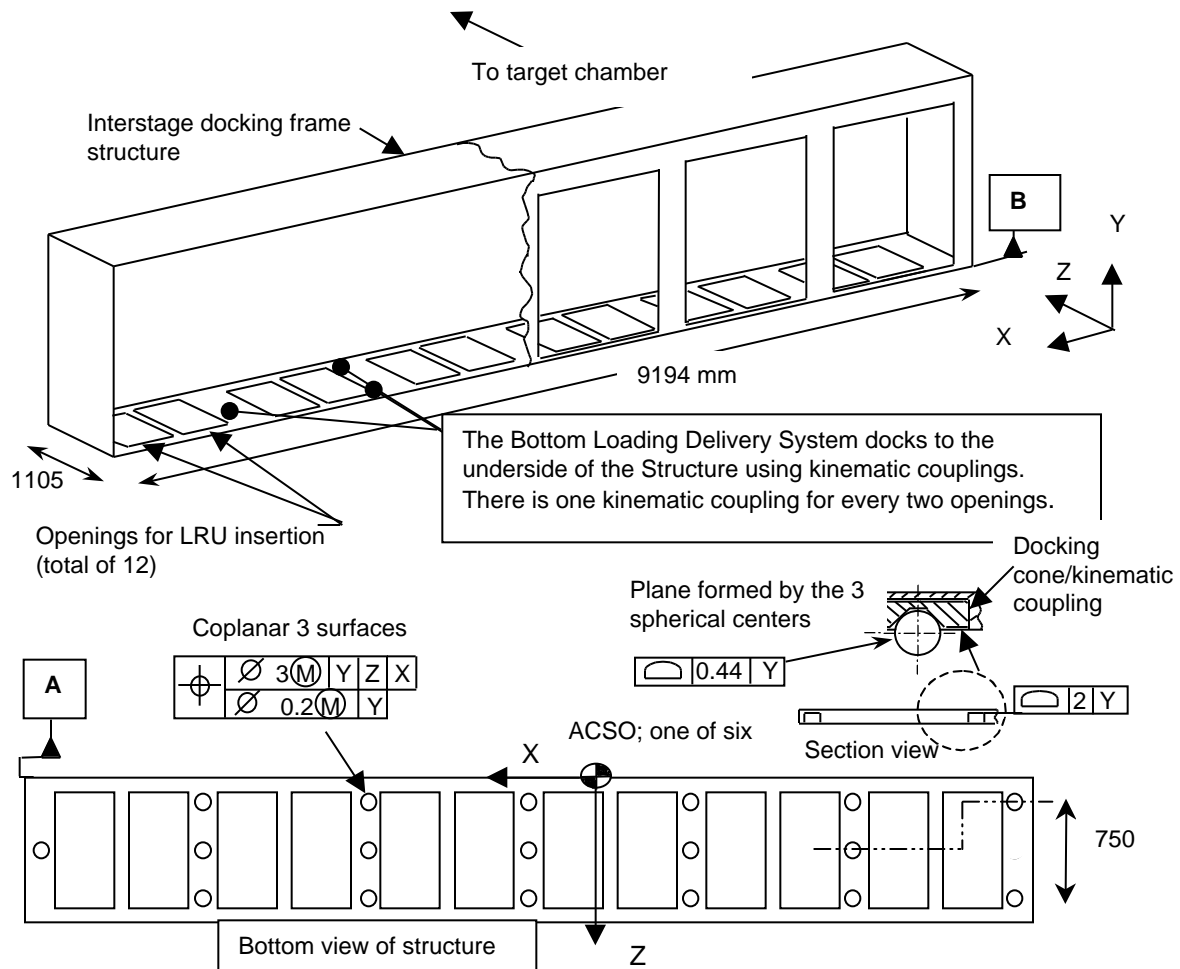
Positional tolerance imposed on the Interstage Docking Structure. To meet the positional tolerance allocation, the fabrication tolerance must be tighter still.
